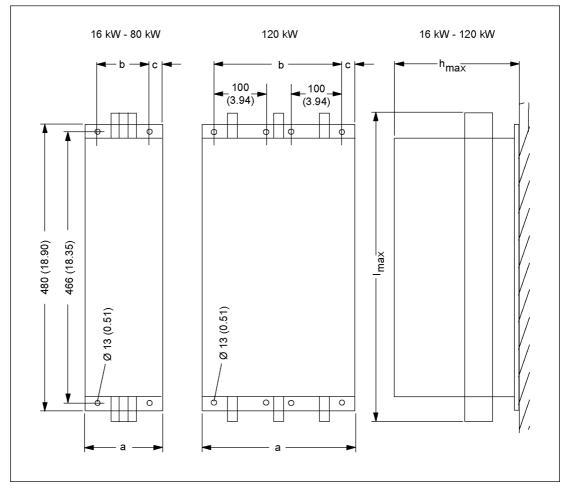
Dimension drawings of the line filter for the Active Line Module
